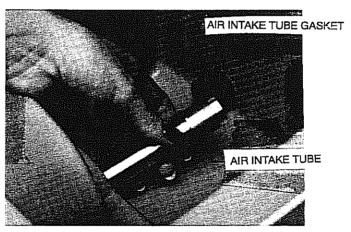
REMOVAL OF AIR INTAKE TUBE
